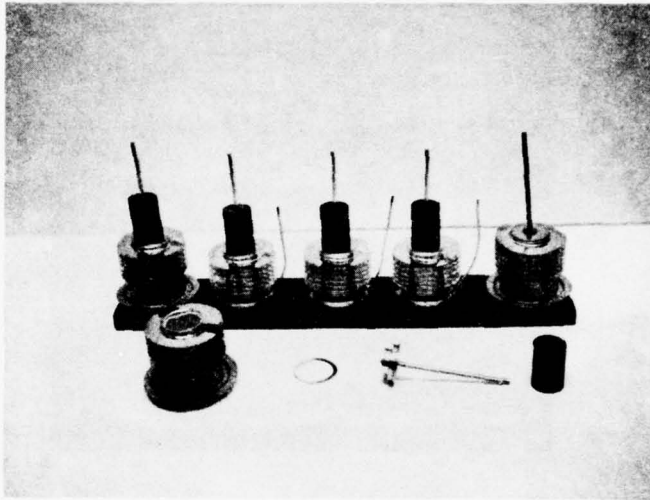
End Cap Brazing Fixture: End caps are brazed into the heat-pipes as shown. The weight is necessary to insure proper seating of the end cap.
